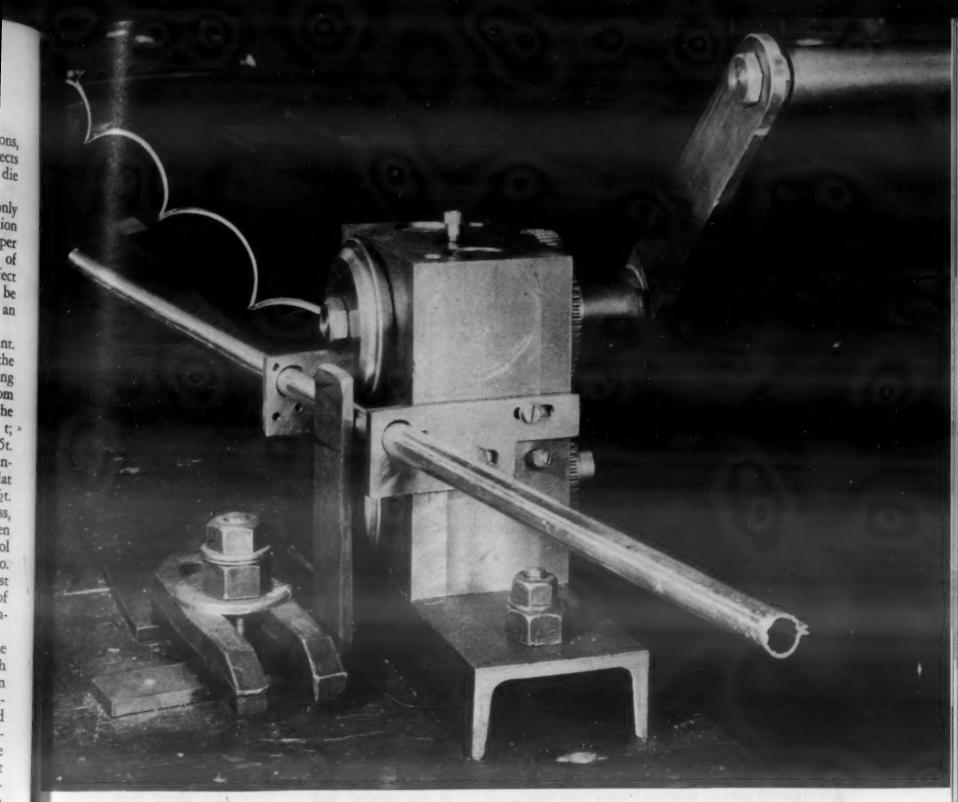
Cold welded pipe is trimmed to remove the metal flange formed by metal flow.
